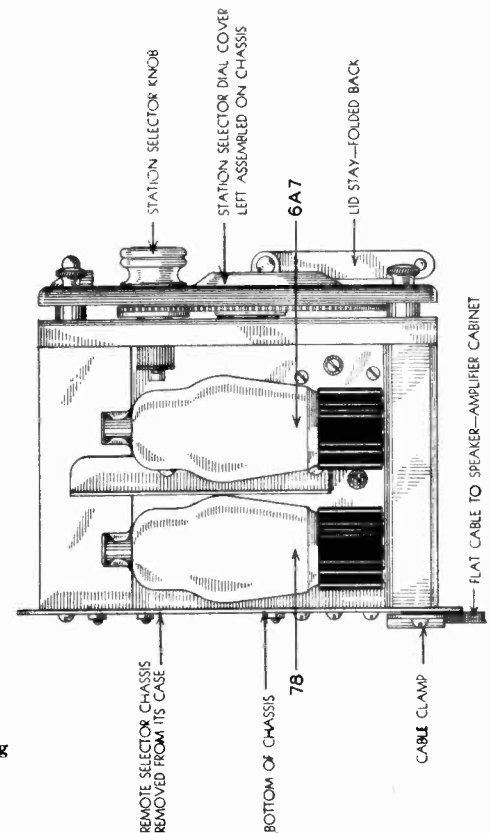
Chassis of Remote Selector removed from its case for Tube Replacement.
